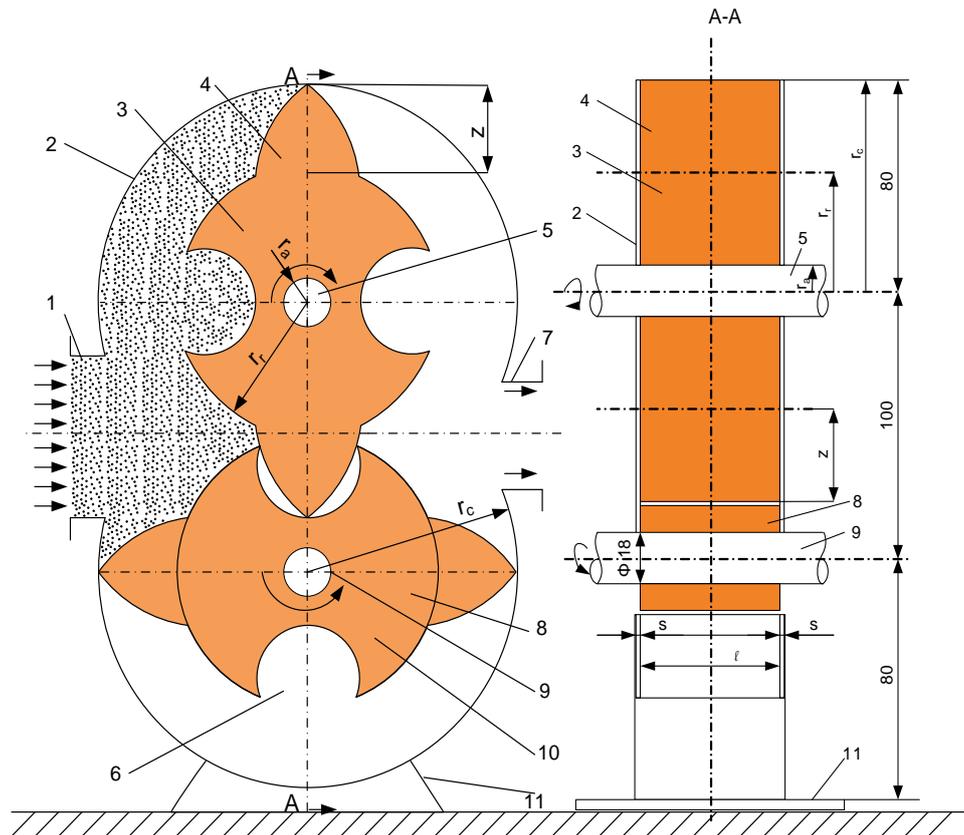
Cross section (a) and longitudinal section (b) through the blower
